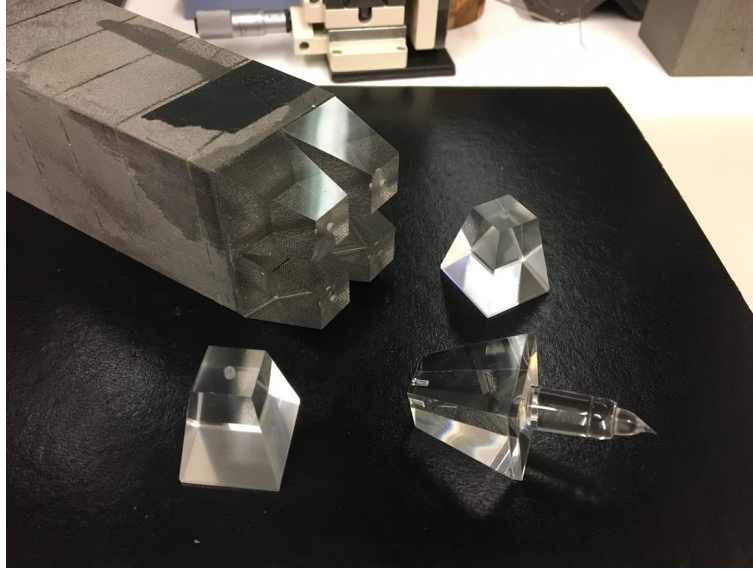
Light guides produced by injection molding showing parts after removal from the mold, after machining and finally glued onto absorber block.
